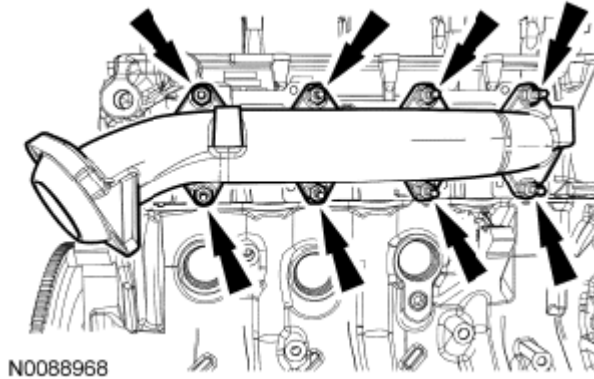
Locating RH Exhaust Manifold And Gaskets
